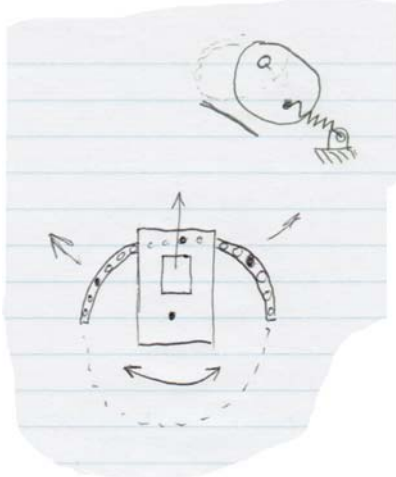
Hand sketch of an initial idea for a cam design. (Above) shows a cam that would have intermittent contact with the deck of cards and drag a single card away from the deck to the rollers. A spring would work to restore the cam to an initial set position not in contact with the cards. (Below) shows pins or a sort of mechanical trigger that would release said spring.
